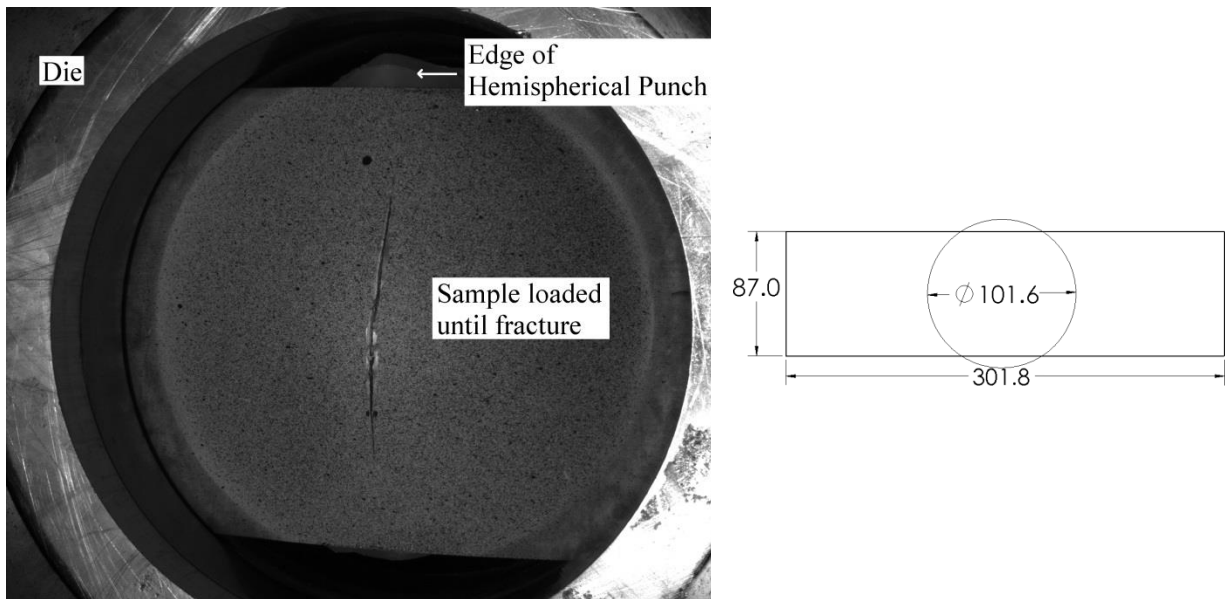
An example of a biaxial hemispherical dome sample strained until fracture, and the blank/punch geometry [all stated dimensions in millimetres]
